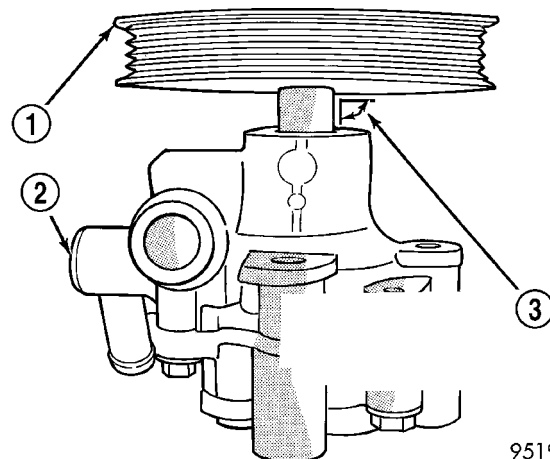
Pulley Positioned On Shaft Of Power Steering Pump (Typical)
